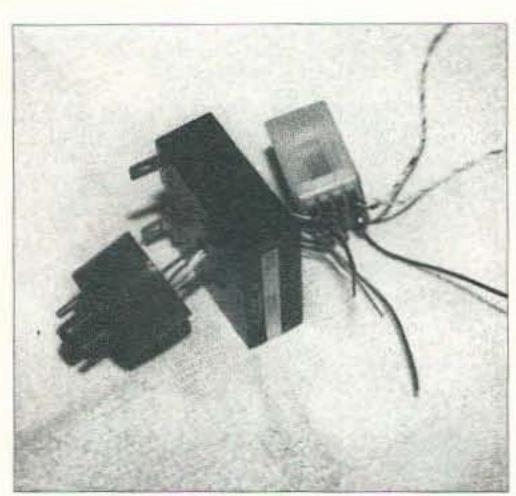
Photo D. An "exploded" view of the component parts. Note the two fast-on connectors. Epoxy the socket base and relay to the module. The pair of striped wires in the upper right will control the two bulbs behind the plate and antenna tune dials.
